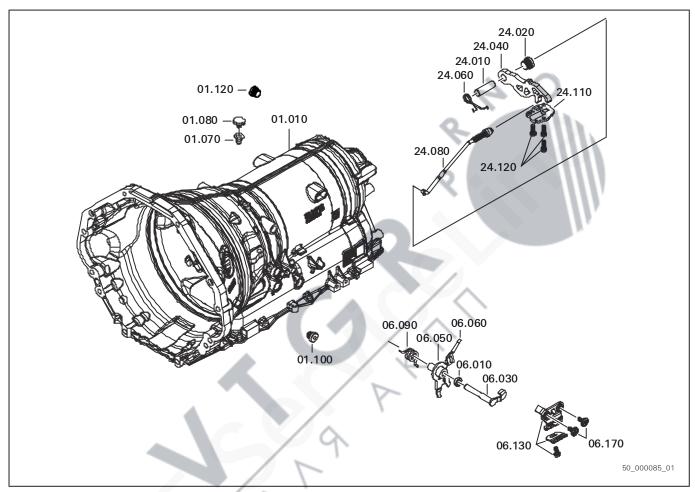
01 - Transmission housing, 06 - Shift system, 24 - Parking lock
